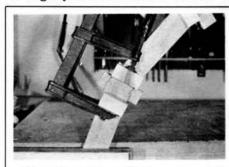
Photo D — Clamp blocks are used to clamp spline joints together. Later the clamp blocks will be removed.
